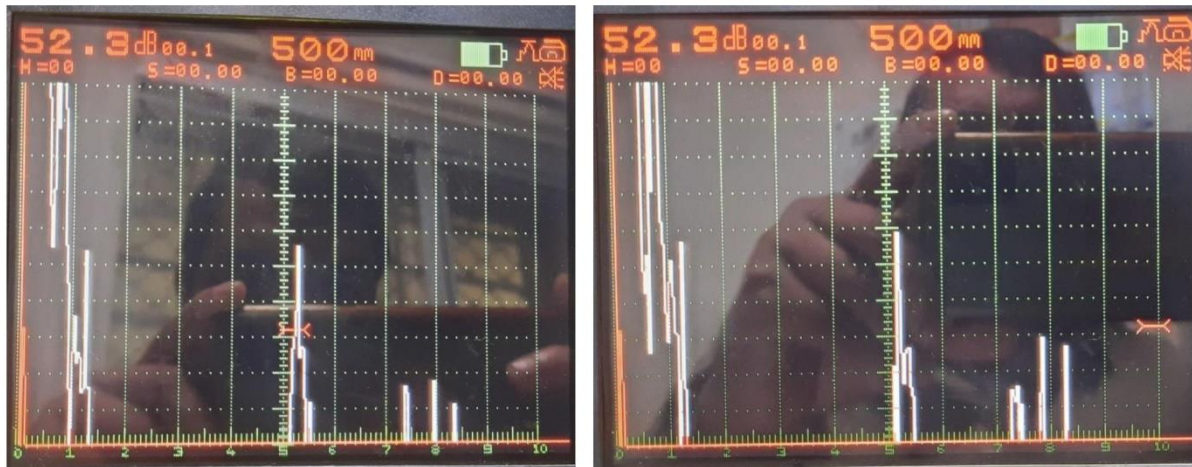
High Angle Scan Trace Pattern of wheel seat inner fillet (For both ends)
